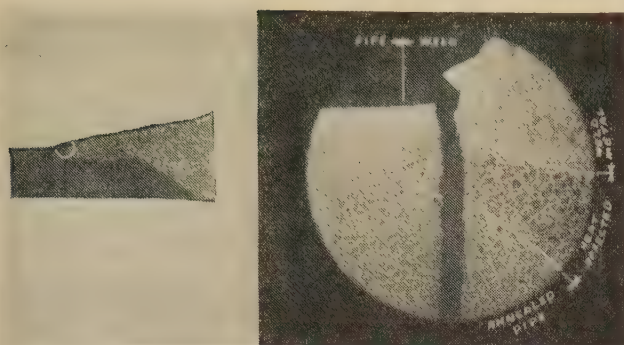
PHOTOMACROGRAPH AND PHOTOMICROGRAPH OF CRACK IN WELDING NECK FLANGE ASSEMBLY
